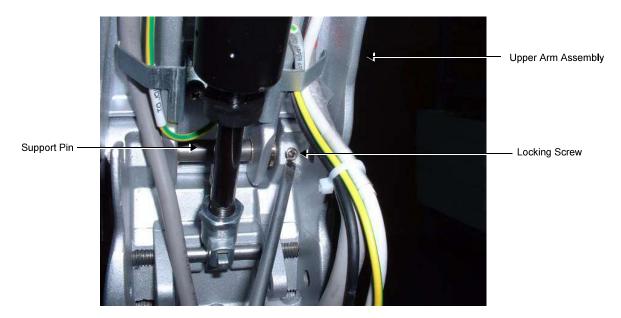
Locking Screw Securing Support Pin on Lower Section of Upper Arm
